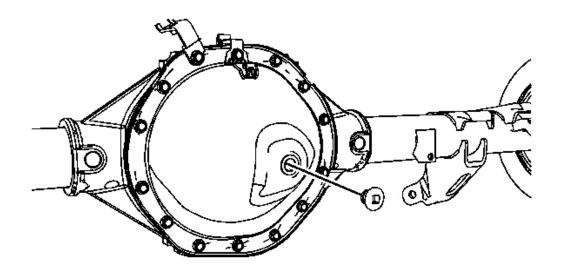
View Of Rear Axle Fill Plug Courtesy of GENERAL MOTORS CORP.
